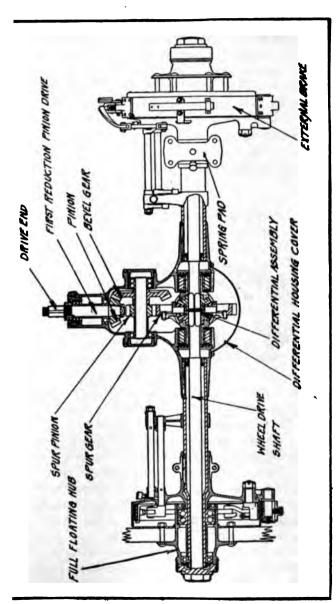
Sectional View of Weston-Mott Double Reduction Full Floating Rear Axia.
